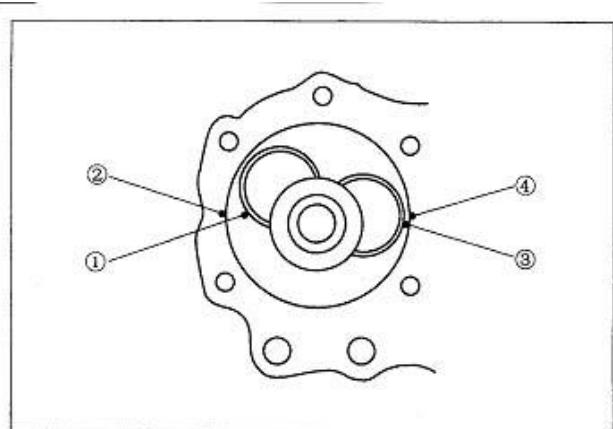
Measurement Points of Piston Surface and Cylinder Block Surface
